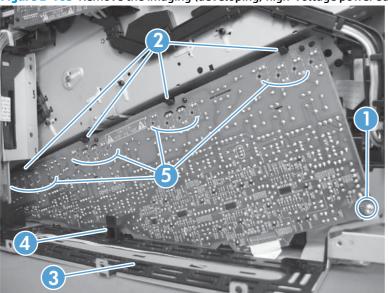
Remove the imaging (developing) high-voltage power supply
